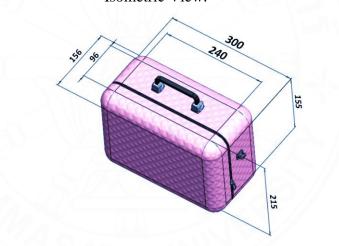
Original Design Of "Design C" – Isometric View with Dimension.
